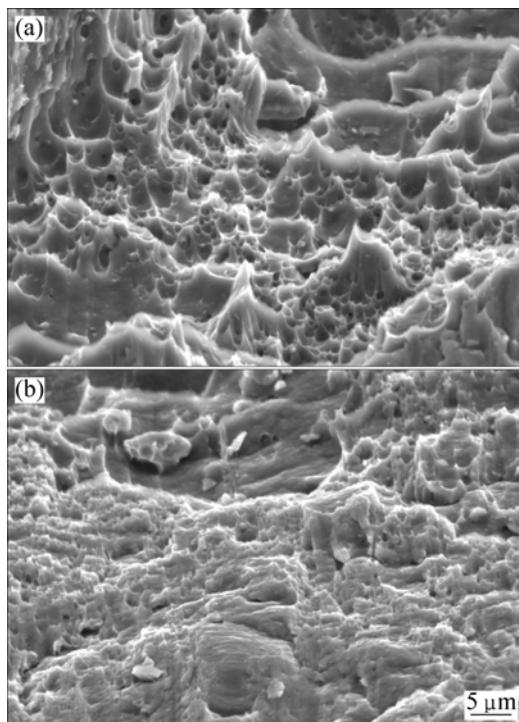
Fracture surfaces of different joints: (a) Normal FSW; (b) Underwater FSW
